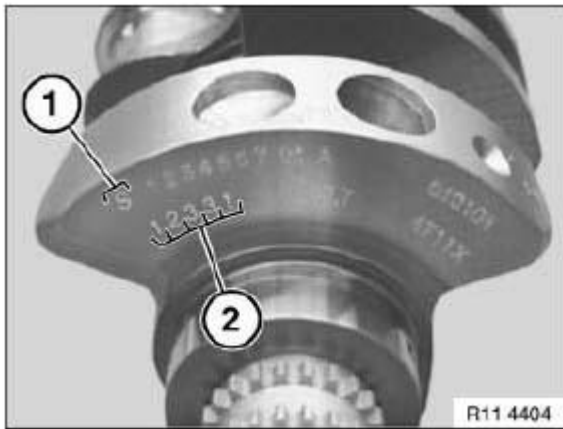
Identifying Crankshaft Construction Stage And Bearing Shell Classification
